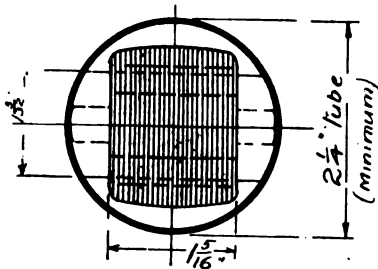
END VIEW OF MANCHESTER TYPE BOILER MOTOR.
